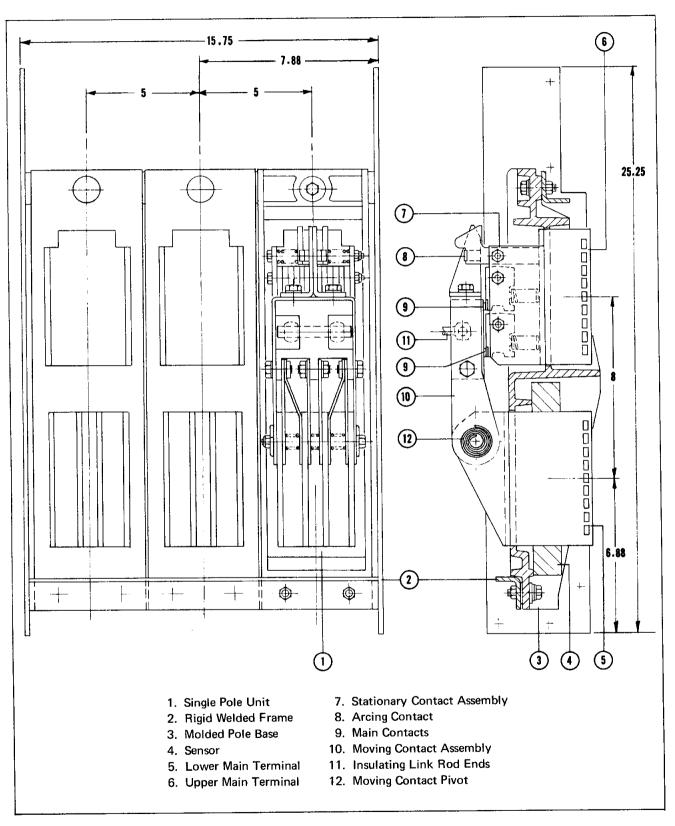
Three-Pole Assembly of DS-532 Pole Units on Frame
